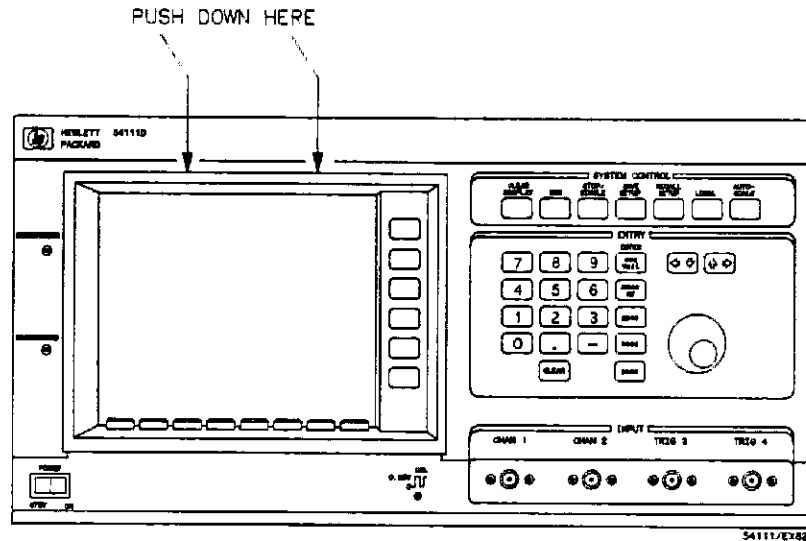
A-3. CRT Bezel Removal Pressure Locations.
